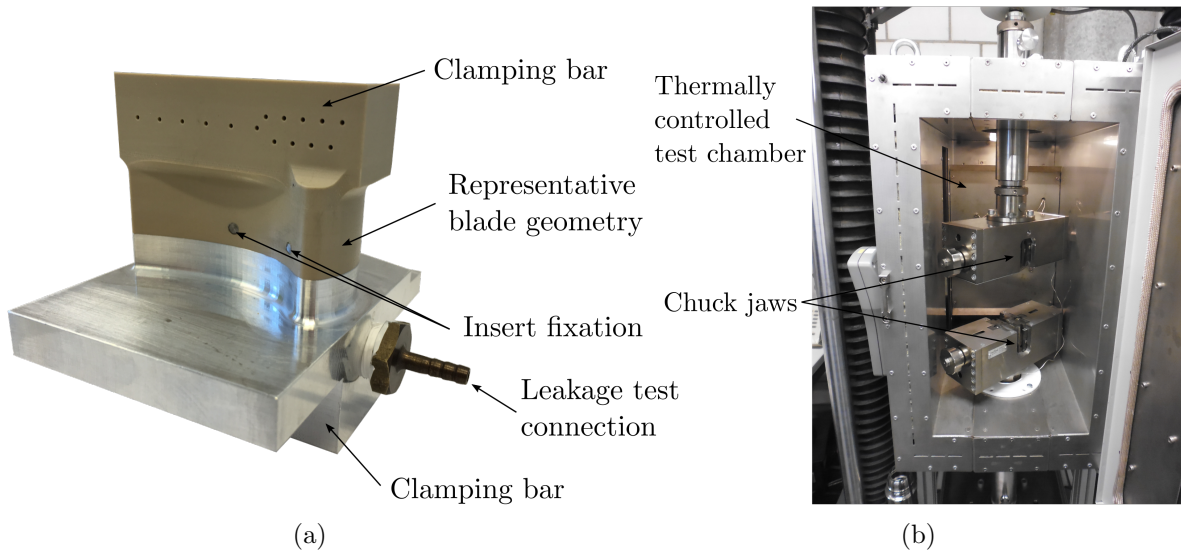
Blade tip insert test assembly for tensile and leakage tests (a). Tensile test machine with a thermally controlled chamber (b).
